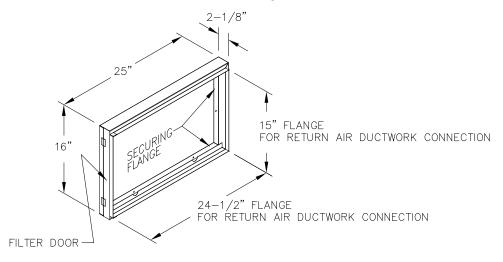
A typical filter rack and dimensions for the OHC furnace.
